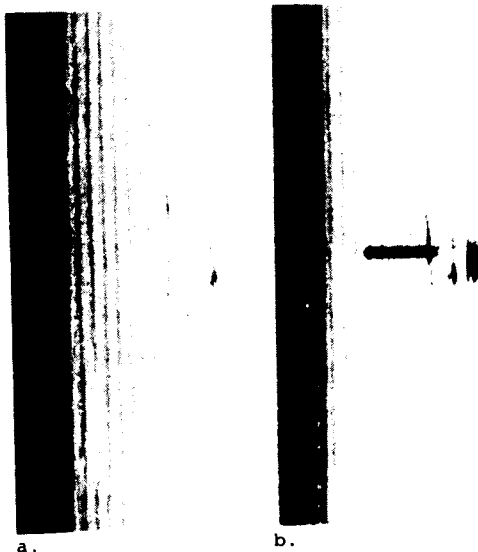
Dye penetration into impact damaged thick composites. Part a) shows the dye uptake into an impact damaged coupon. Part b) shows the same coupon with a small hole drilled to allow the dye to penetrate the interior.
